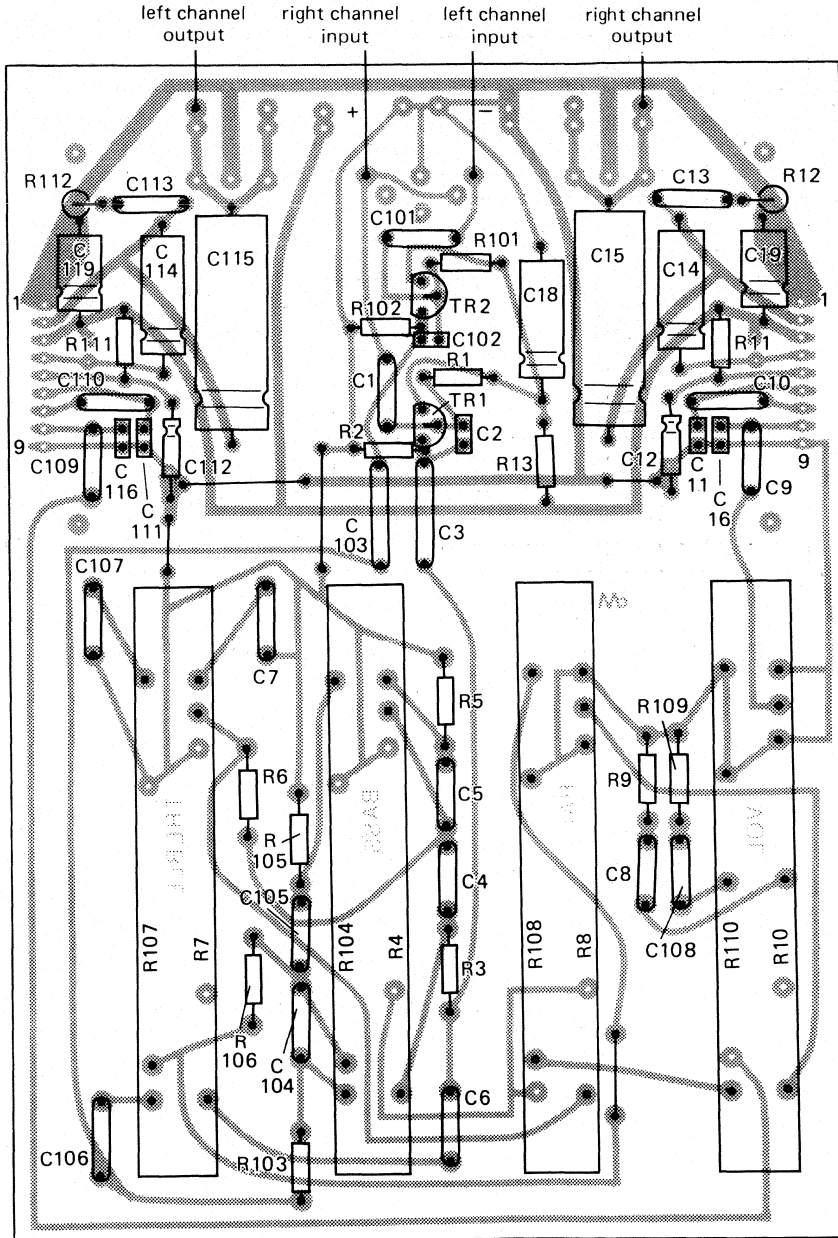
Component side of printed-circuit board showing component layout used for the circuit of Fig. 17 (Fig. 16 partly).
